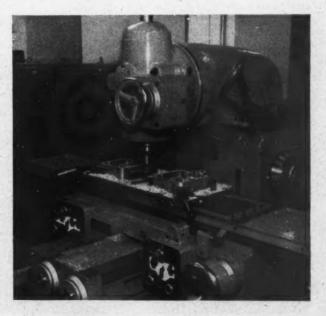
Close-up view of the Fritz Werner type FV 2D tapecontrolled vertical milling machine set up for operations on switch box components
